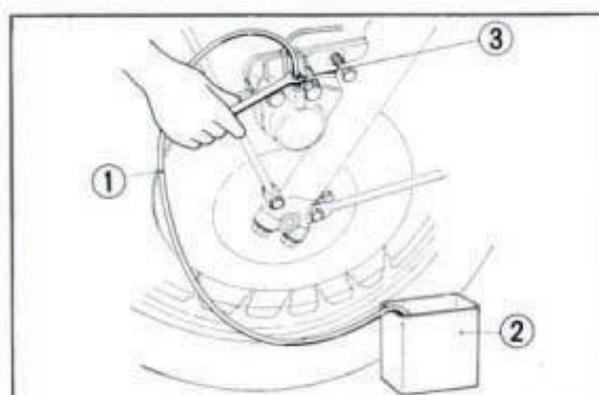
① Bleeder tube ② Vessel ③ Bleeder screw
